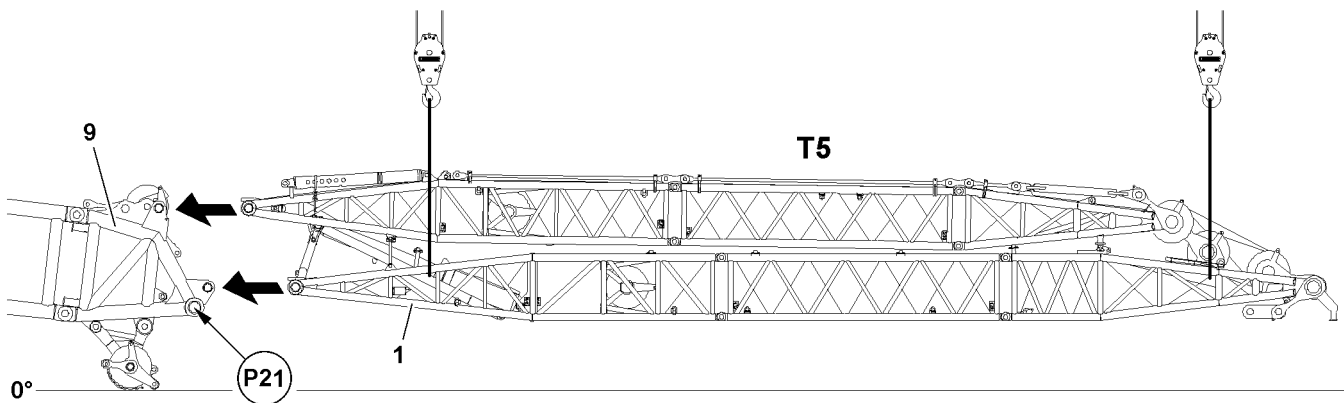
Swing the transport unit T5 in with the auxiliary cranes for assembly on the W-connector head
